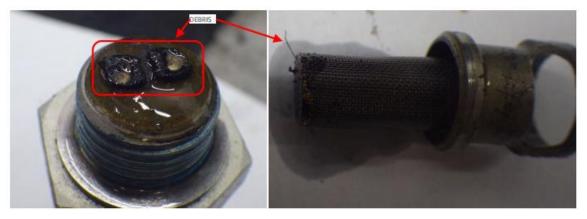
The auxiliary gearbox chip detector and chip detector screen. (Source: Engine manufacturer)
